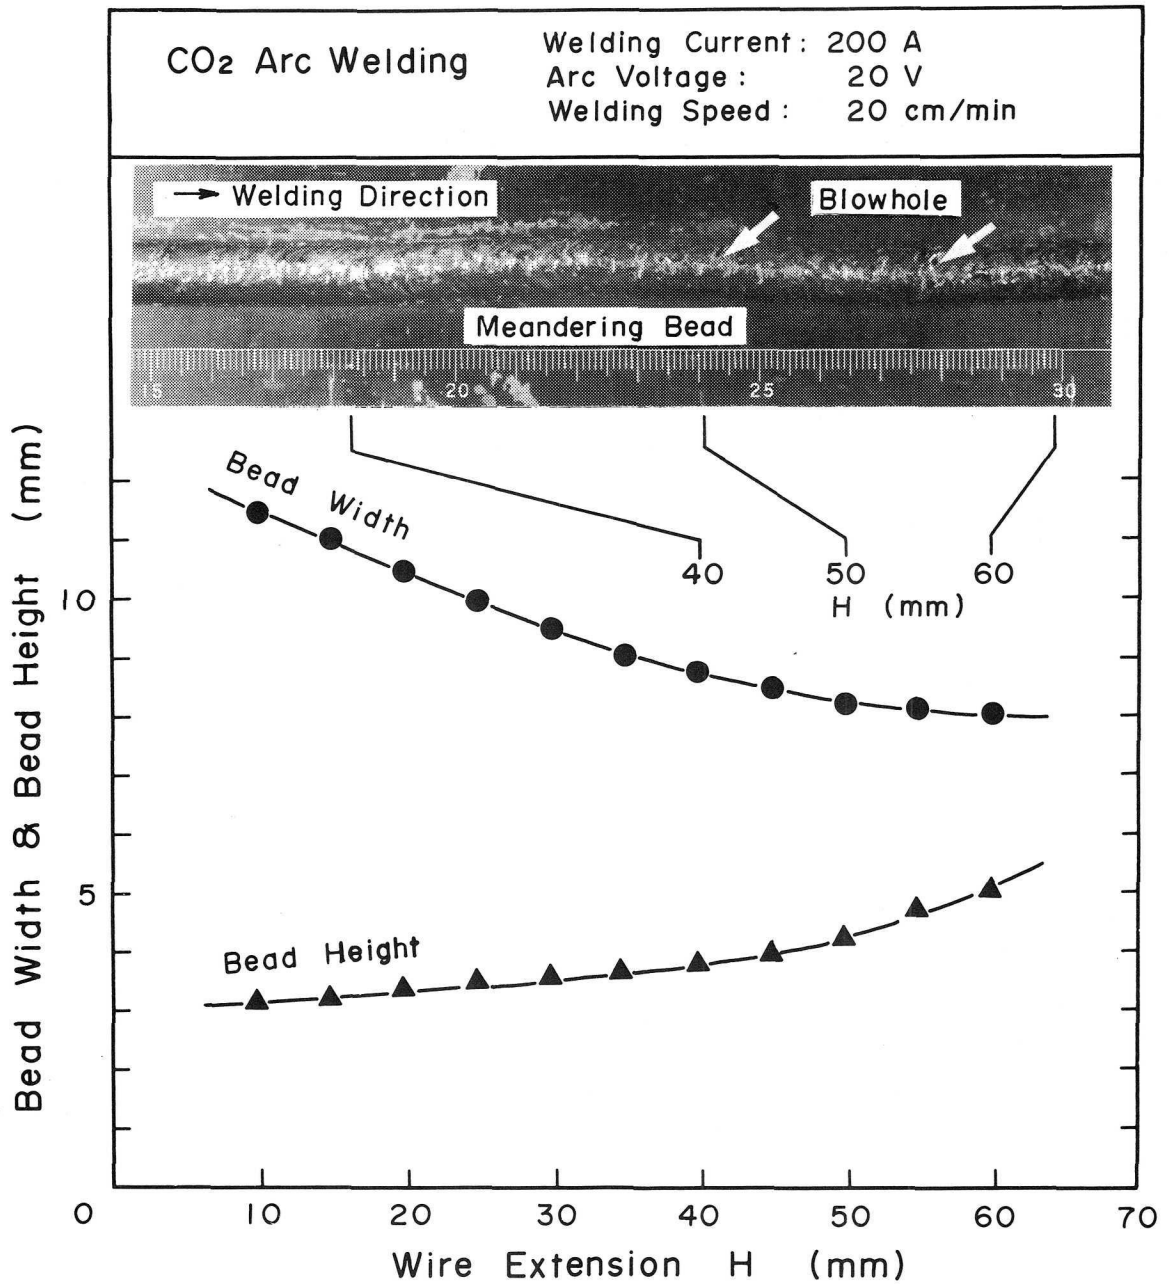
Influences of the wire extension on the weld bead.
